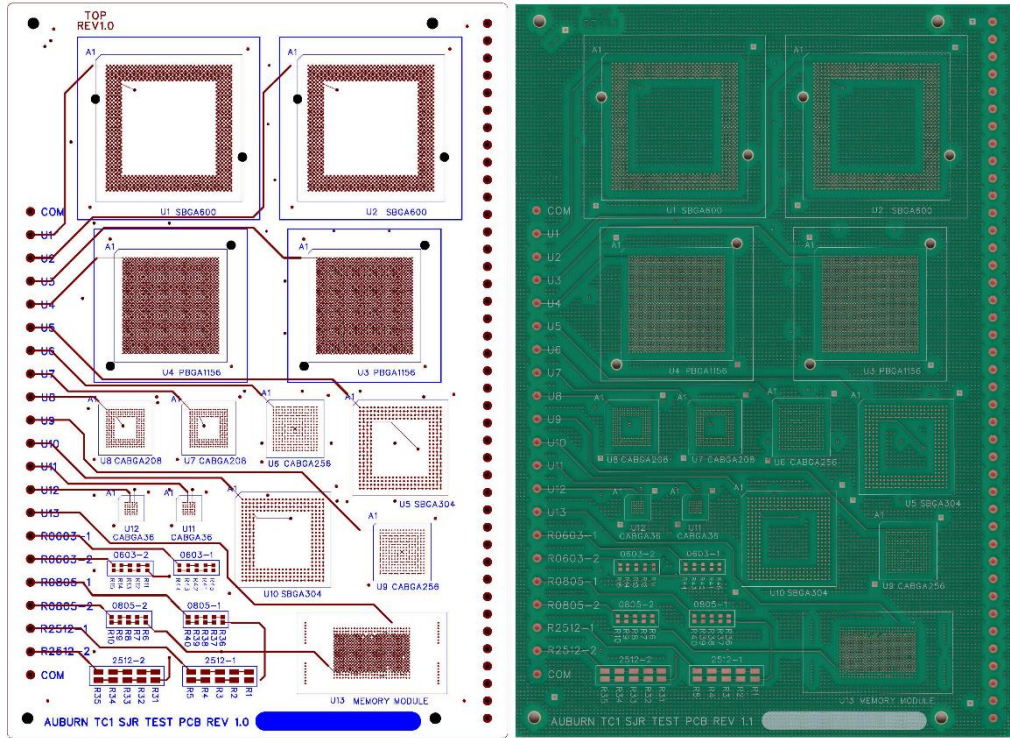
TC1-SRJ Test Vehicle: Top-Side (Schematic and Un-assembled PCB).
